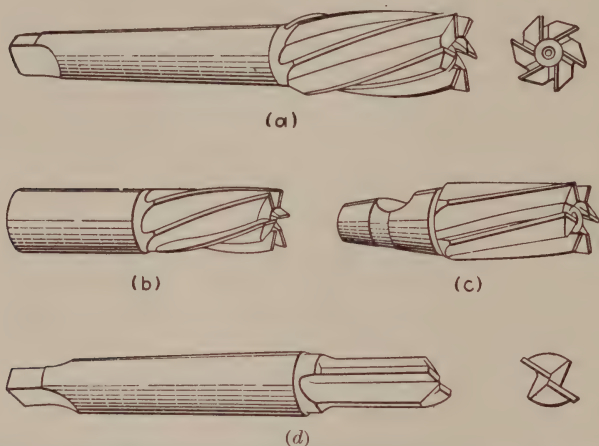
End mills: (a) taper-shank spiral end mill; (b) straight shank; (c) cam-lock shank; (d) two-lip end mill.
